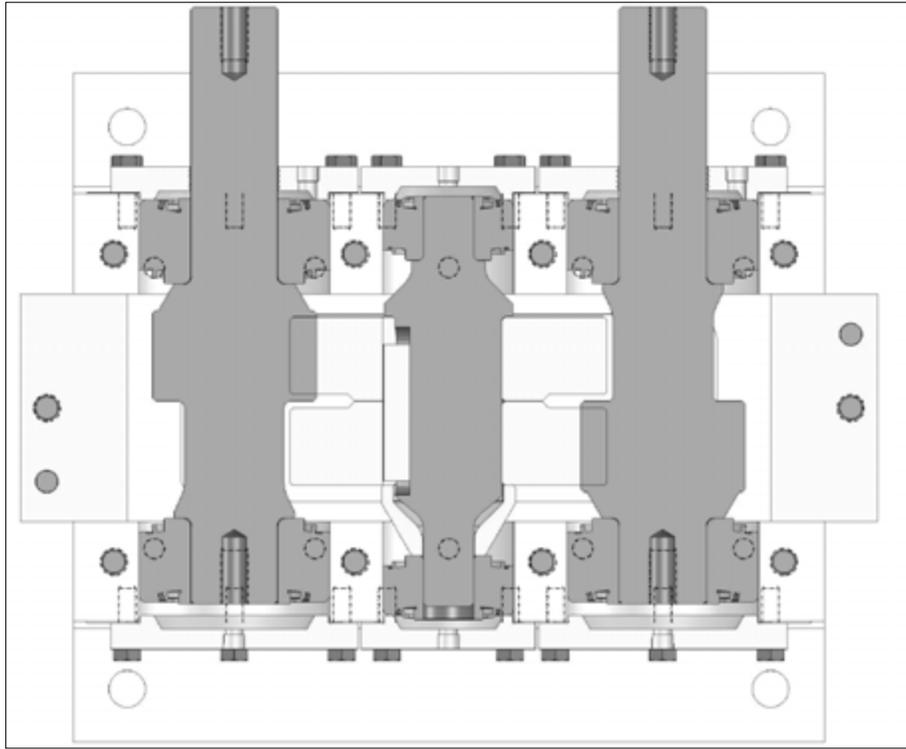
Preliminary layout of 3-Hole Test gearbox
